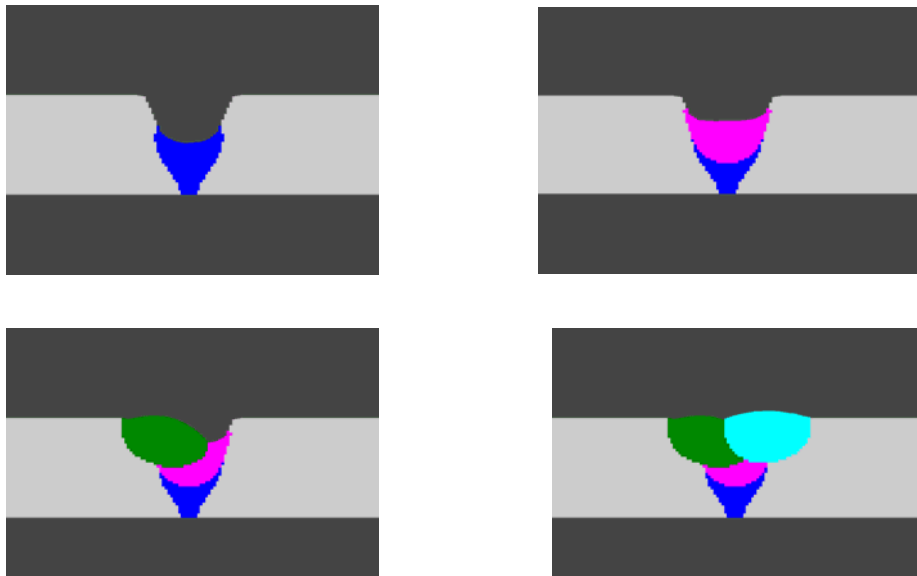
Simulation of multi-pass MAG welding (SM490, 12mmt)
